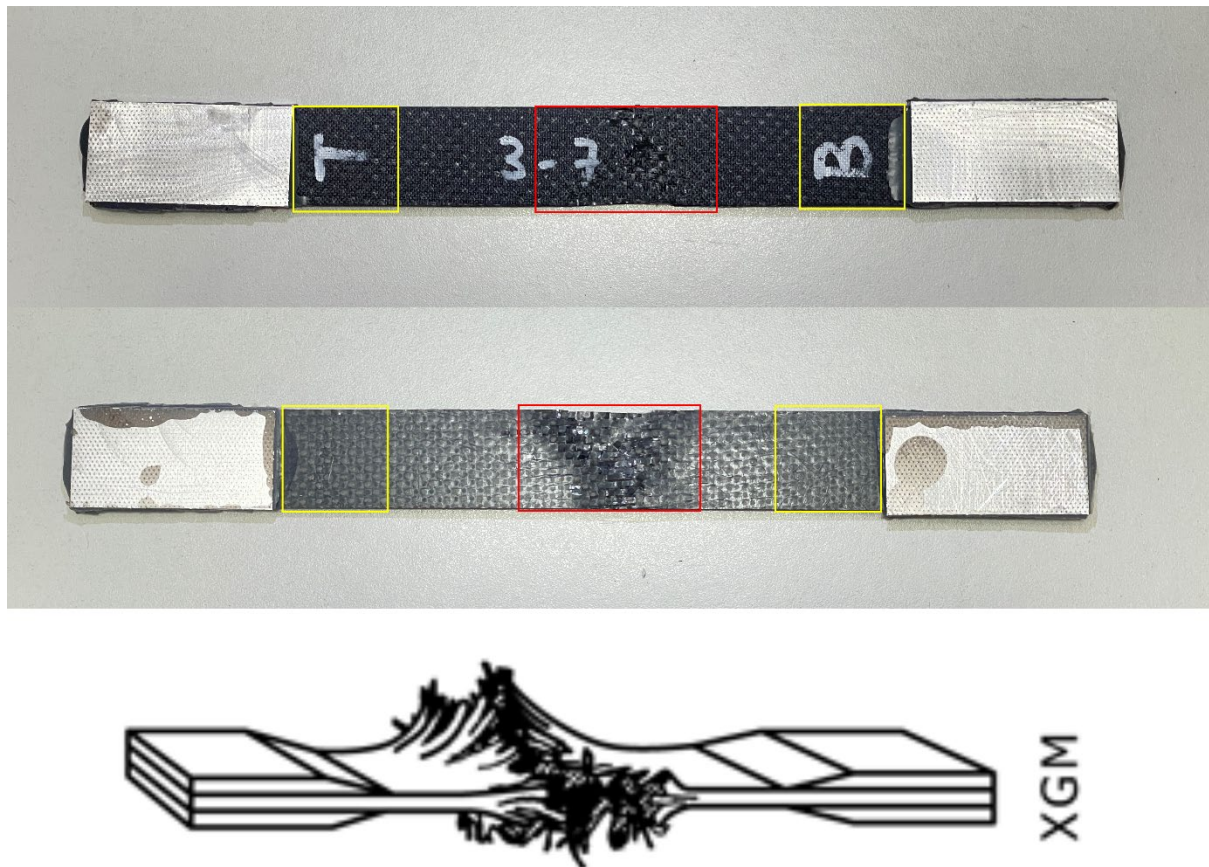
Specimen with failure mode - X G M (eXplosive type, Gage area, Middle location)
